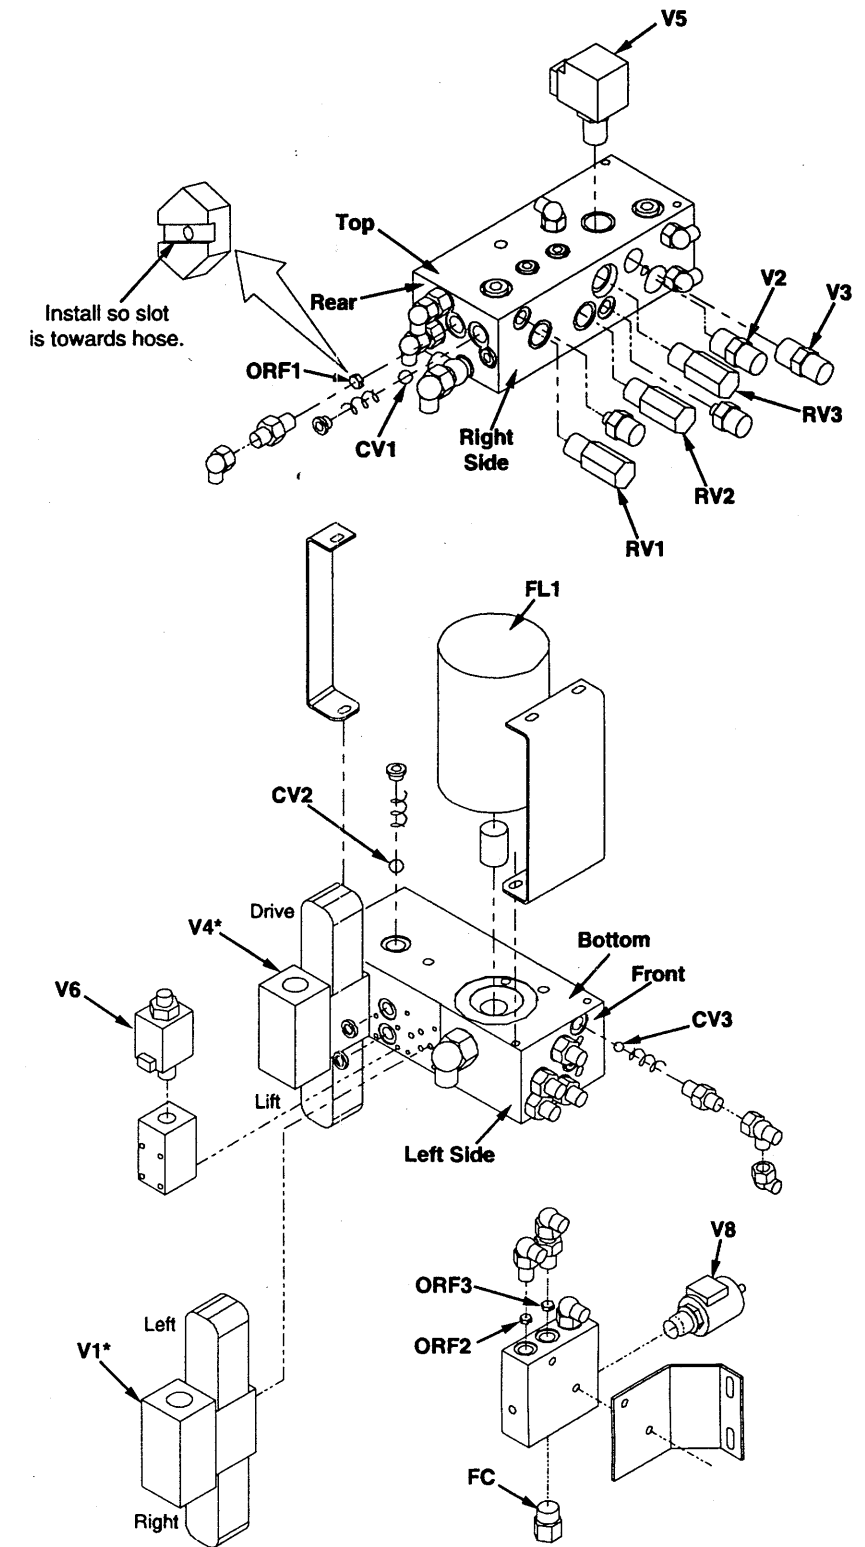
Hydraulic Manifold and Cylinder Valve Assembly
